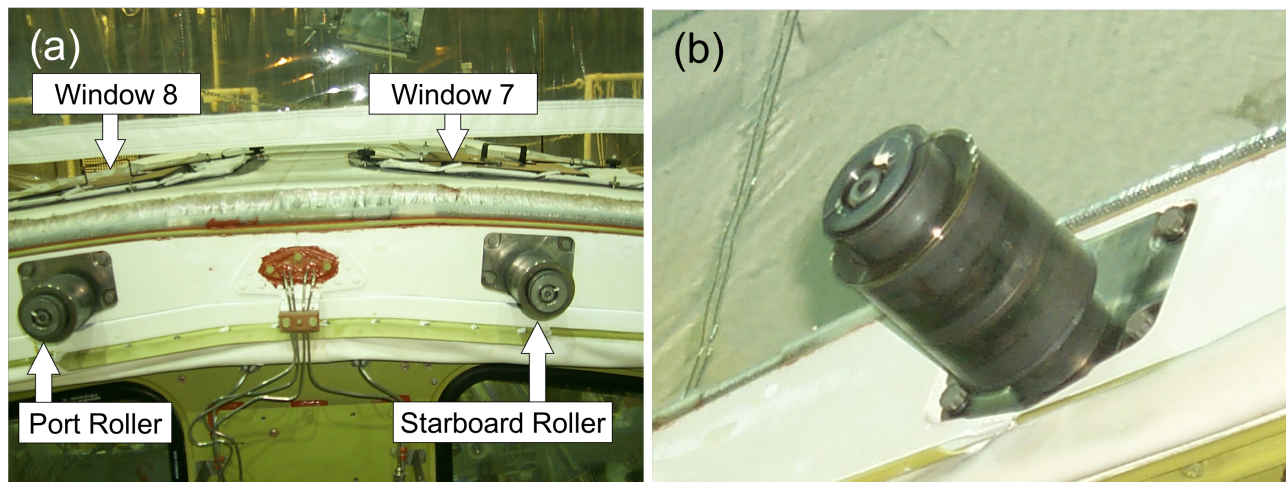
(a) Exemplar configuration of the PLBD latch rollers and crew module overhead Window 7 and Window 8 of Space Shuttle *Endeavor* (b) Close-up view of PLBD roller.
